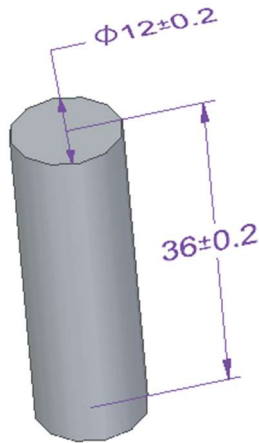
Shape and dimensions of the cylindrical sample of adhesive compositions for the compressive strength tests
